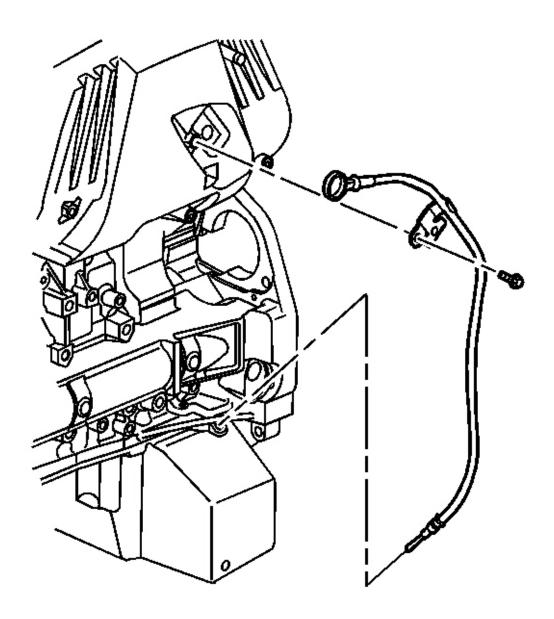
View Of Oil Level Indicator & Tube Courtesy of GENERAL MOTORS CORP.
